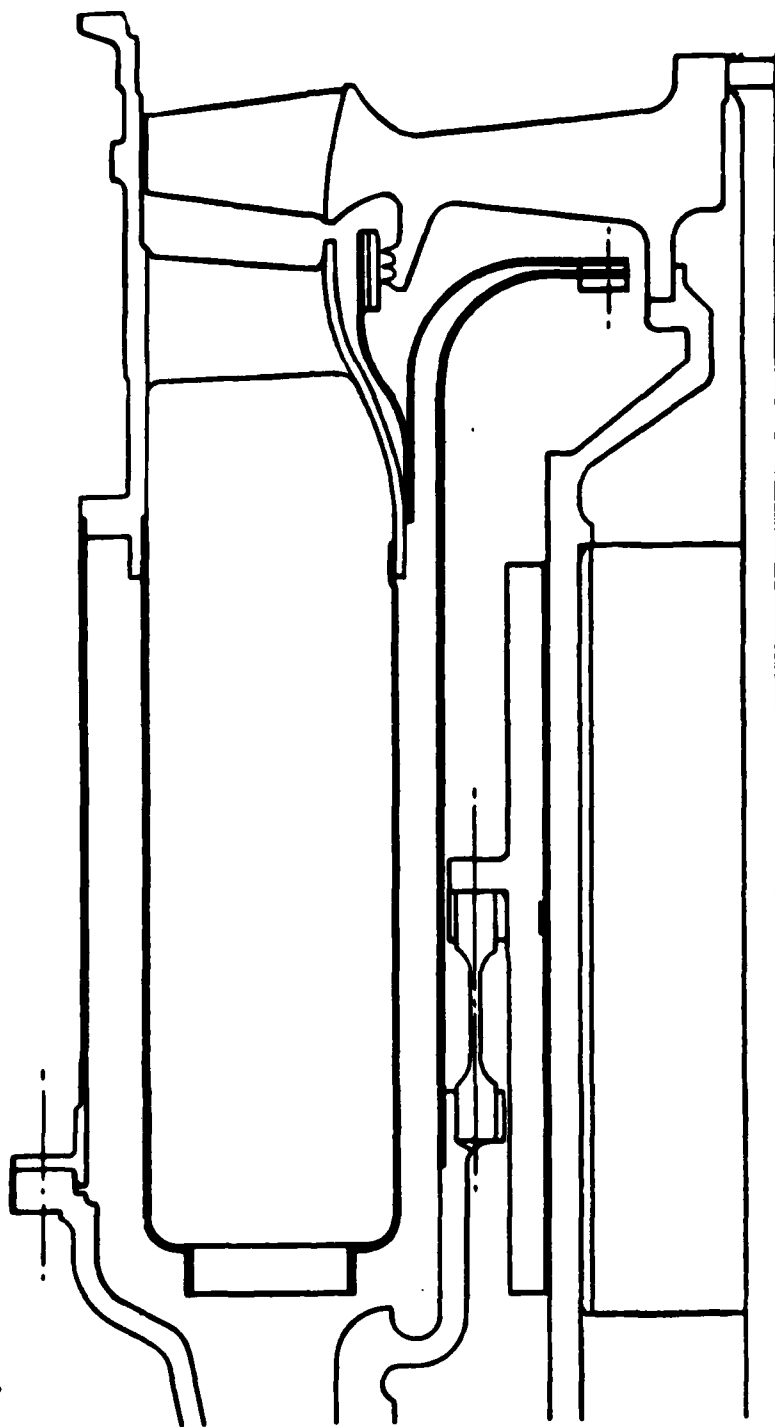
TJE331-1029 Turbine End Foil Bearing, 3.5-Inch Diameter Journal.
